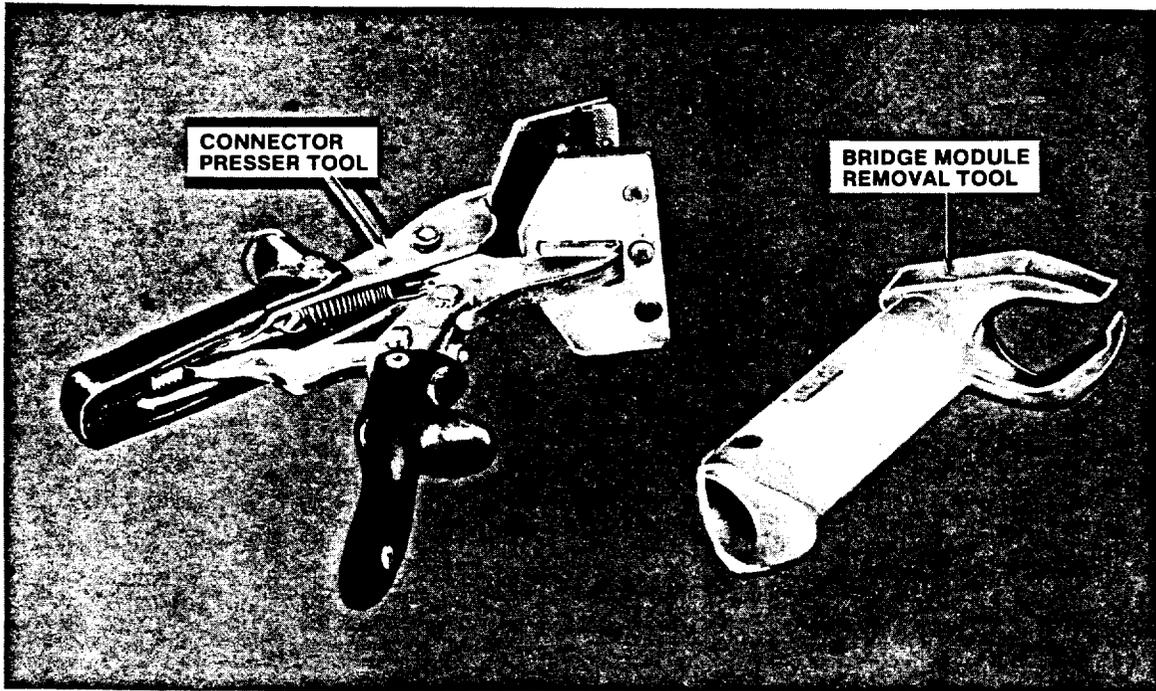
AT-8948L Connector Presser and AT-8927C Bridge Module Removal Tool
